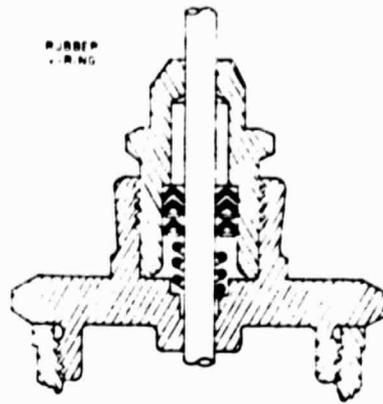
psi Packing for 1/2 to 1-1/4 in. Screwed Valve Bodies.
